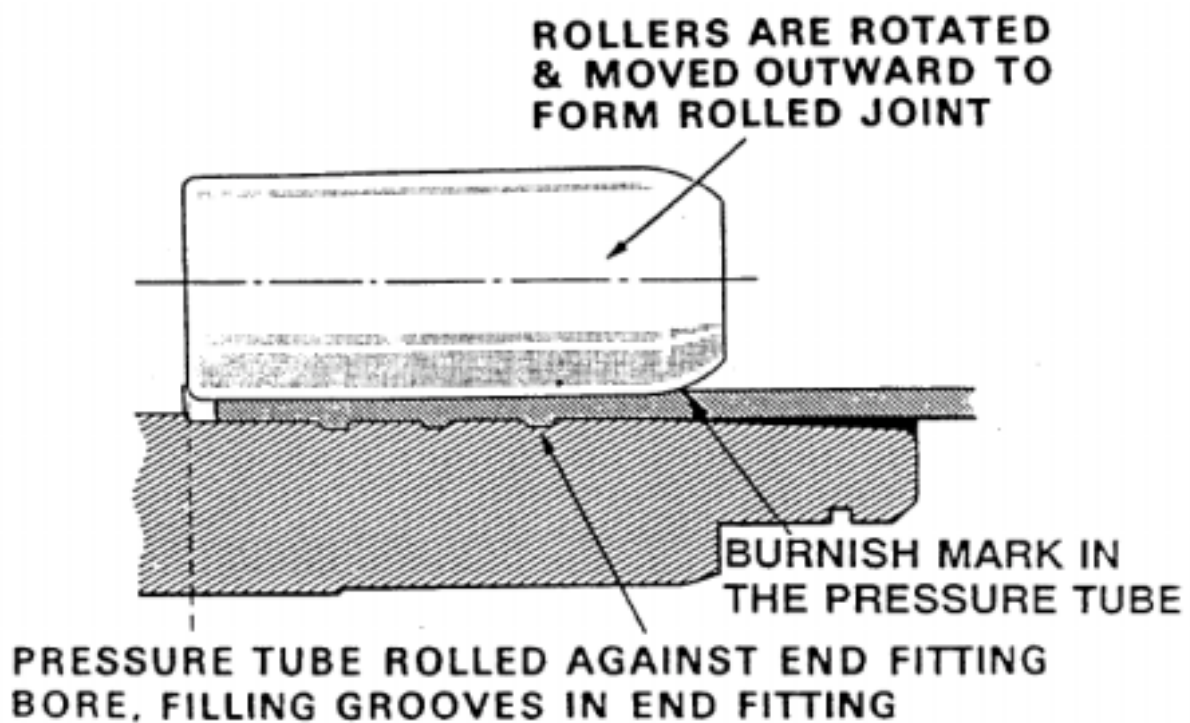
Typical Pressure Tube to End Fitting Rolled Joint
